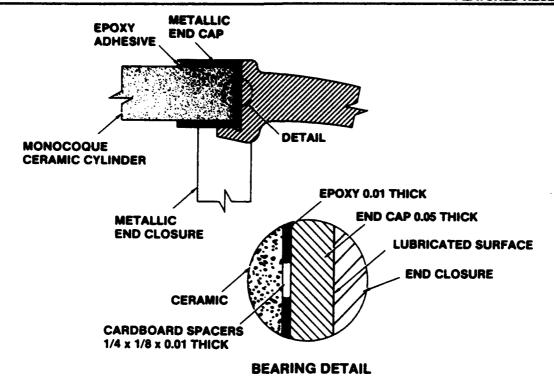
Encapsulation of ceramic bearing surfaces in metallic end caps against fretting.
